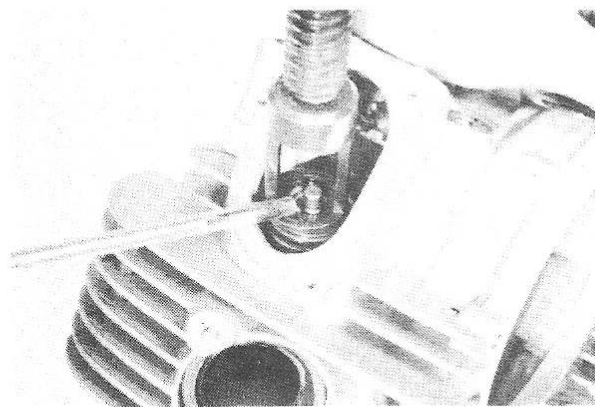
B.10 Compress the valve spring with the special tool and remove the keepers with a magnet or small needle-nose pliers (Sec 9)
